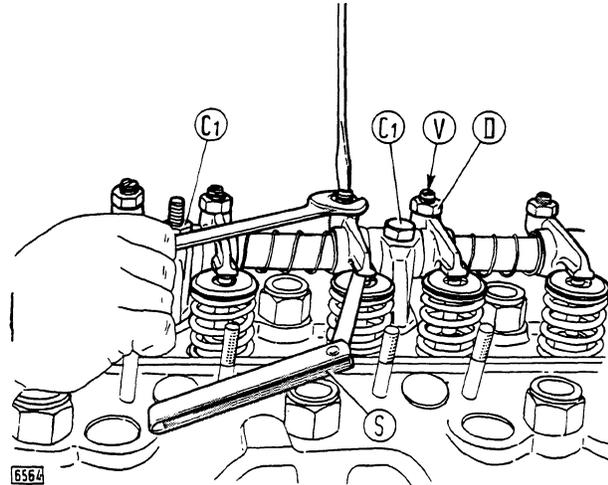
Adjusting rocker arm-to-valve clearance.
